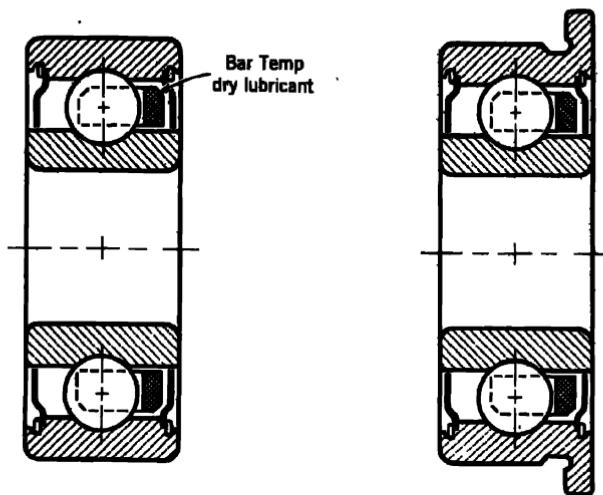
Bearing with dry lubricant. Cross-sectional view of BarTemp deep groove bearings, flanged and unflanged, shielded with a one-piece retainer. (Courtesy of Barden Corporation.)
